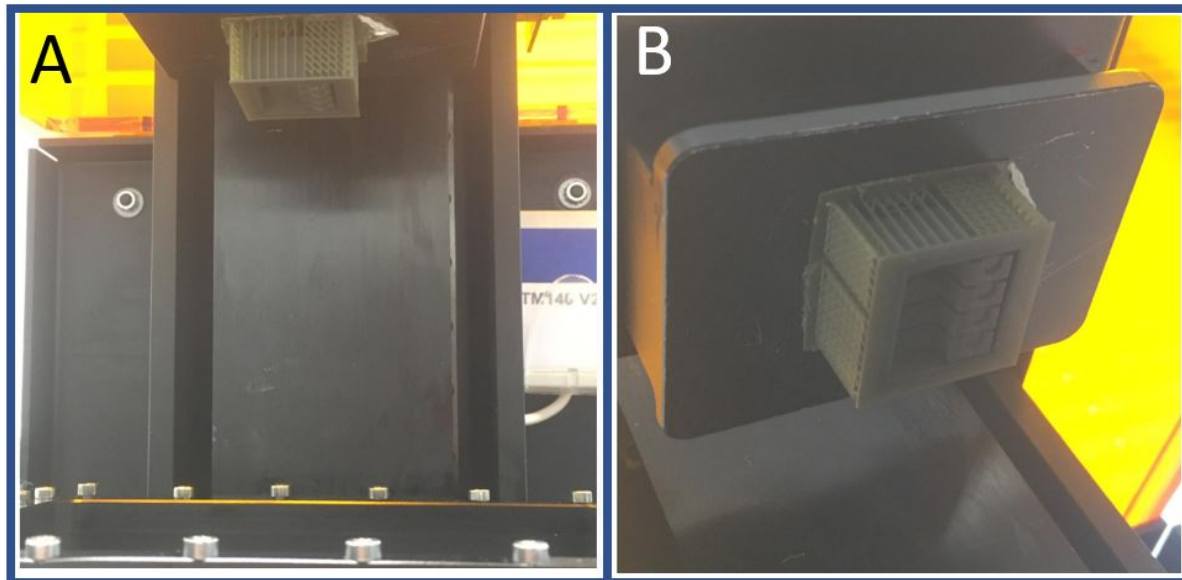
Two different views of a print on the build plate. The print is printed upside down to be able to cover each new layer with resin by withdrawing the print from the resin pool and immersing it again. A) Front view B) Isometric view
